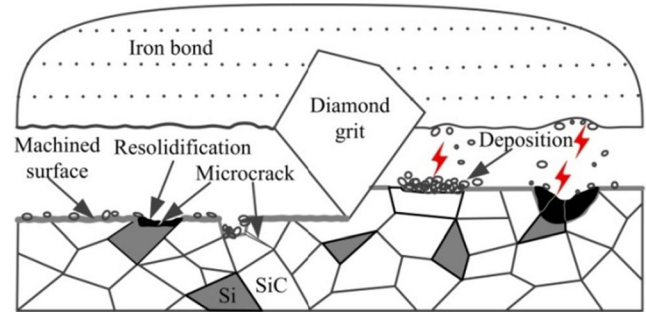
Detail of machined surface and subsurface damage formation in EDDG of RB-SiC ceramics
